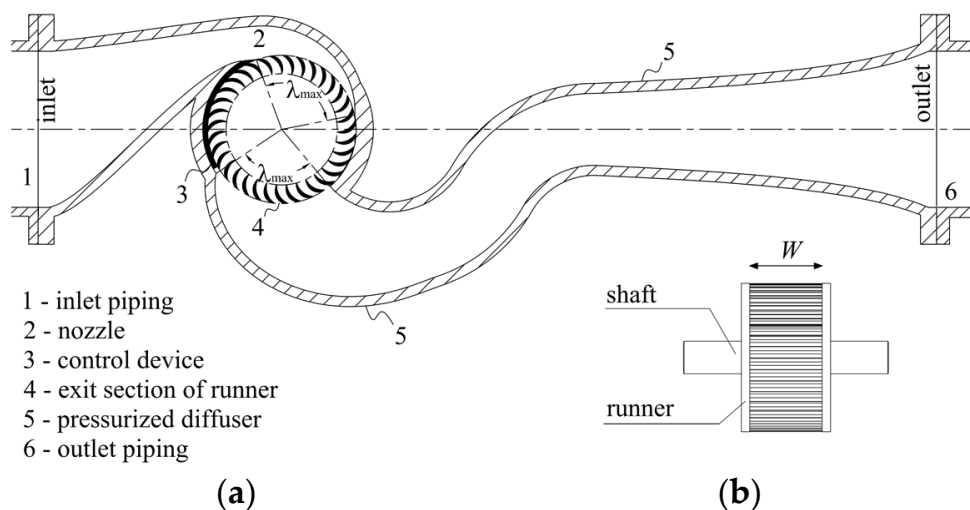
PRS turbine for medium head jumps: (a) Section view of the turbine in a symmetry plan; (b) Side view of the rotor [9,13].
